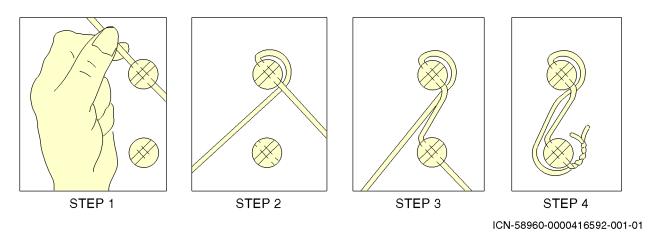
Single-Twist Method of Safety Wiring Two Fasteners
